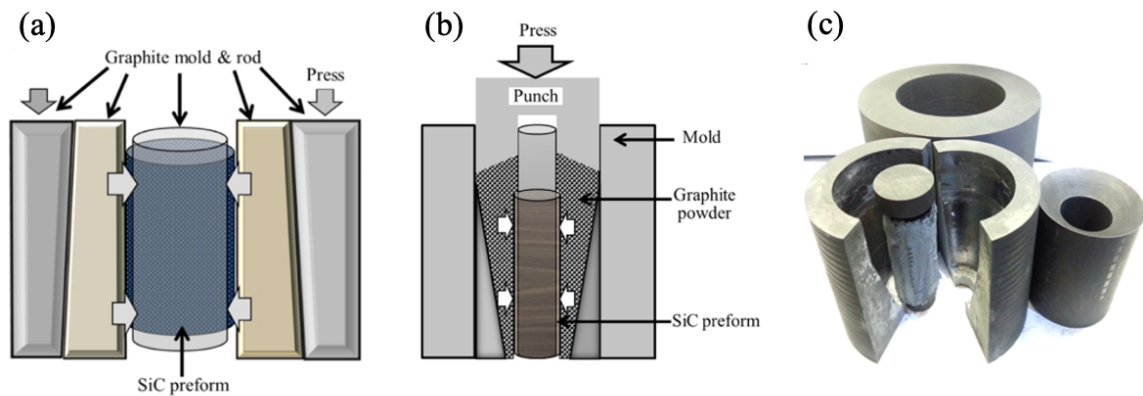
(a) Conventional mold design, (b) out-in mold design, and (c) out-in mold. [40]
